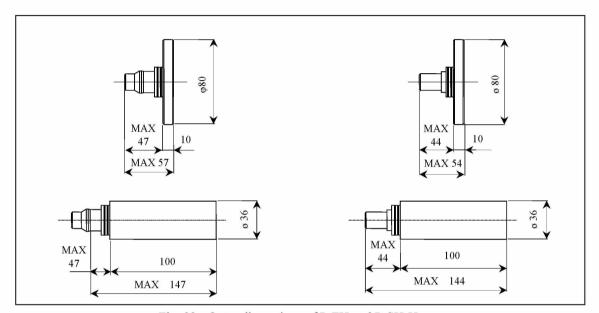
Outer dimensions of P-FH and P-SH-H
